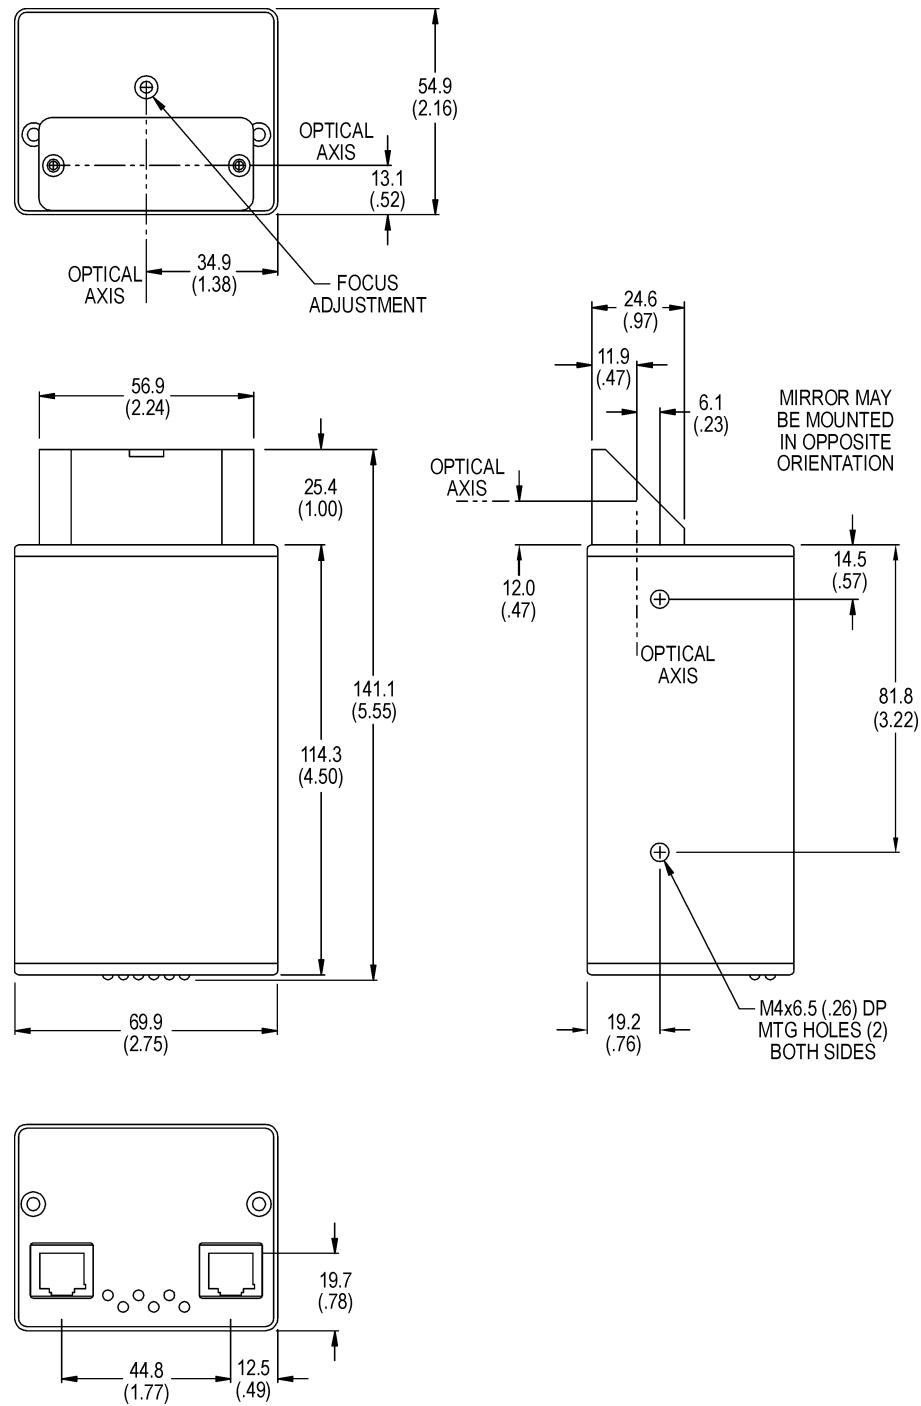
1701 Wafer Reader Dimensions with Horizontal Mirror Mount
